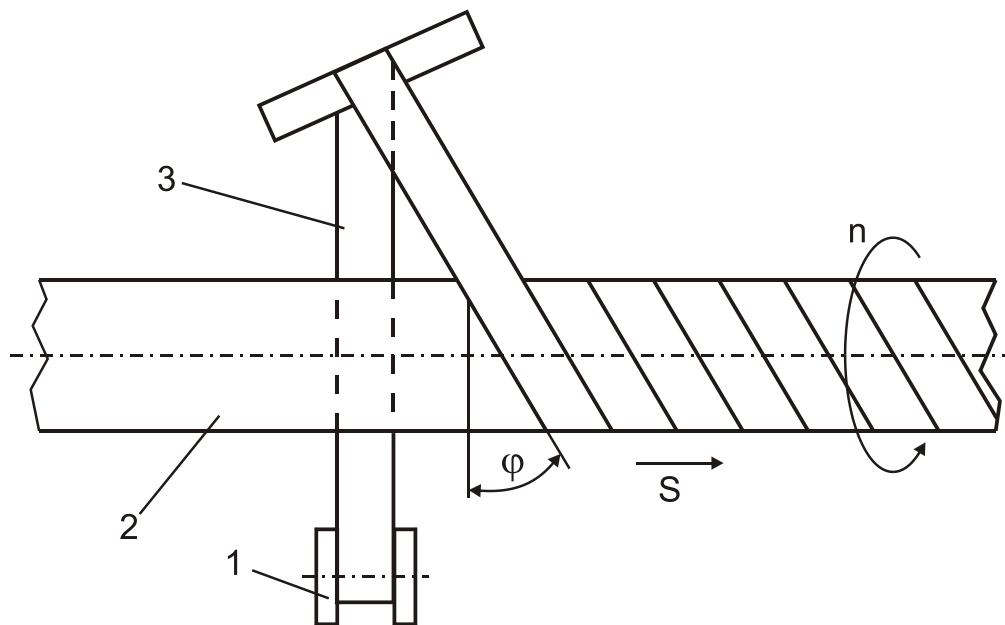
Scheme of spiral winding: 1 – bobbin with tape; 2 – mandrel; 3 – winding tape
